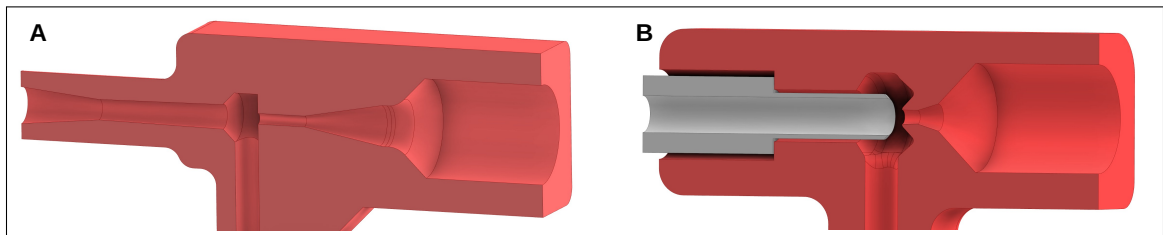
The two 3D printed Venturi designs used in early prototypes. - A) Cutaway view of the single-part design.
